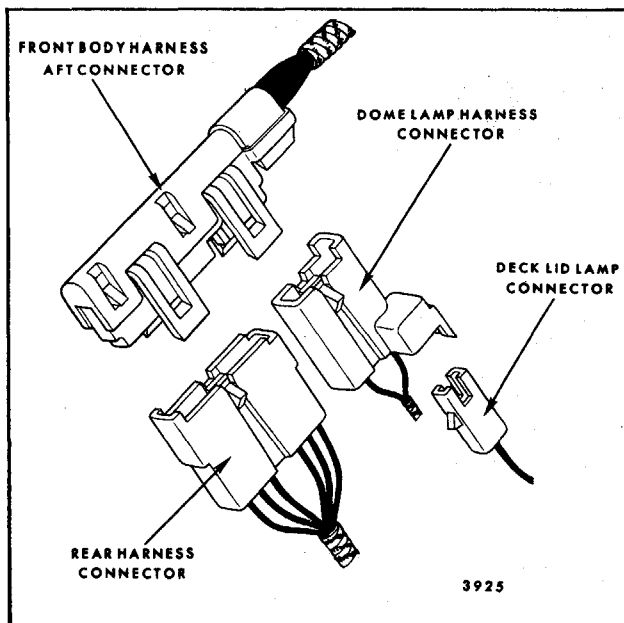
Front Body Harness - Aft Connector - "F" Style Shown
